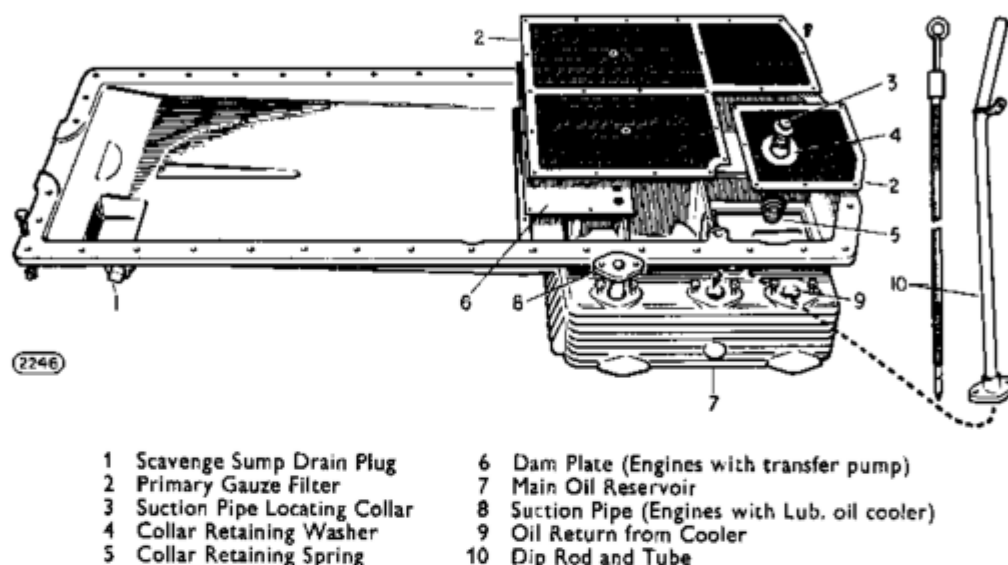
6LX Engine Lubricating Oil Sump: Type 28
